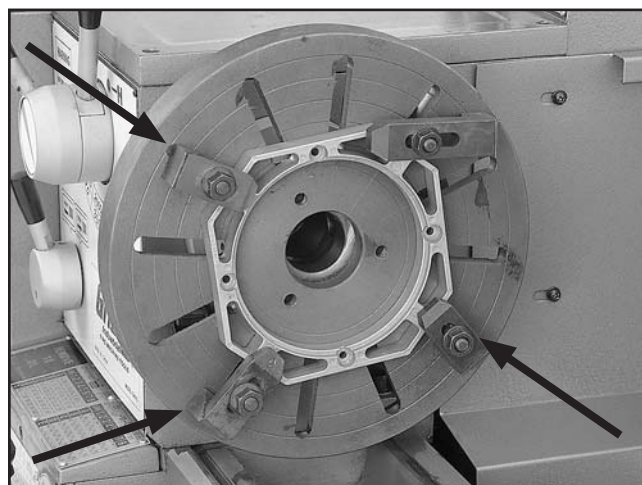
Example of the faceplate with properly mounted workpiece clamped in four locations.
